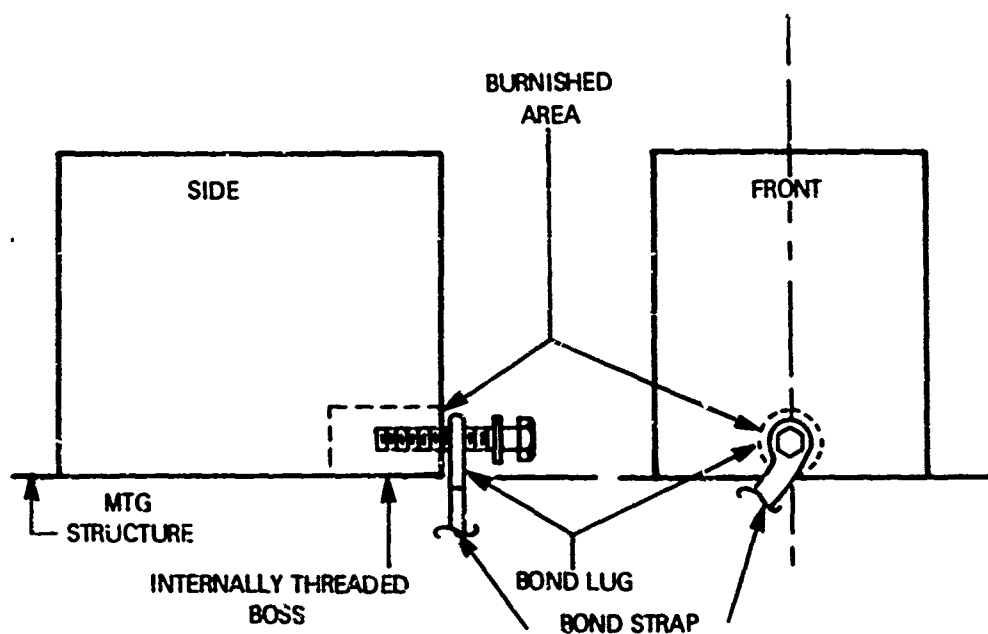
OPTIONAL METHOD OF BONDING A UNIT TO MOUNTING STRUCTURE
